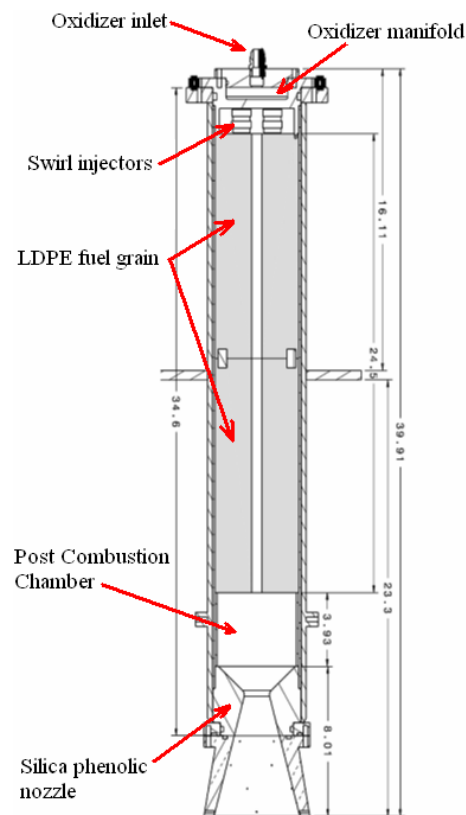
900 lbf thrust hybrid rocket motor assembly drawing.
